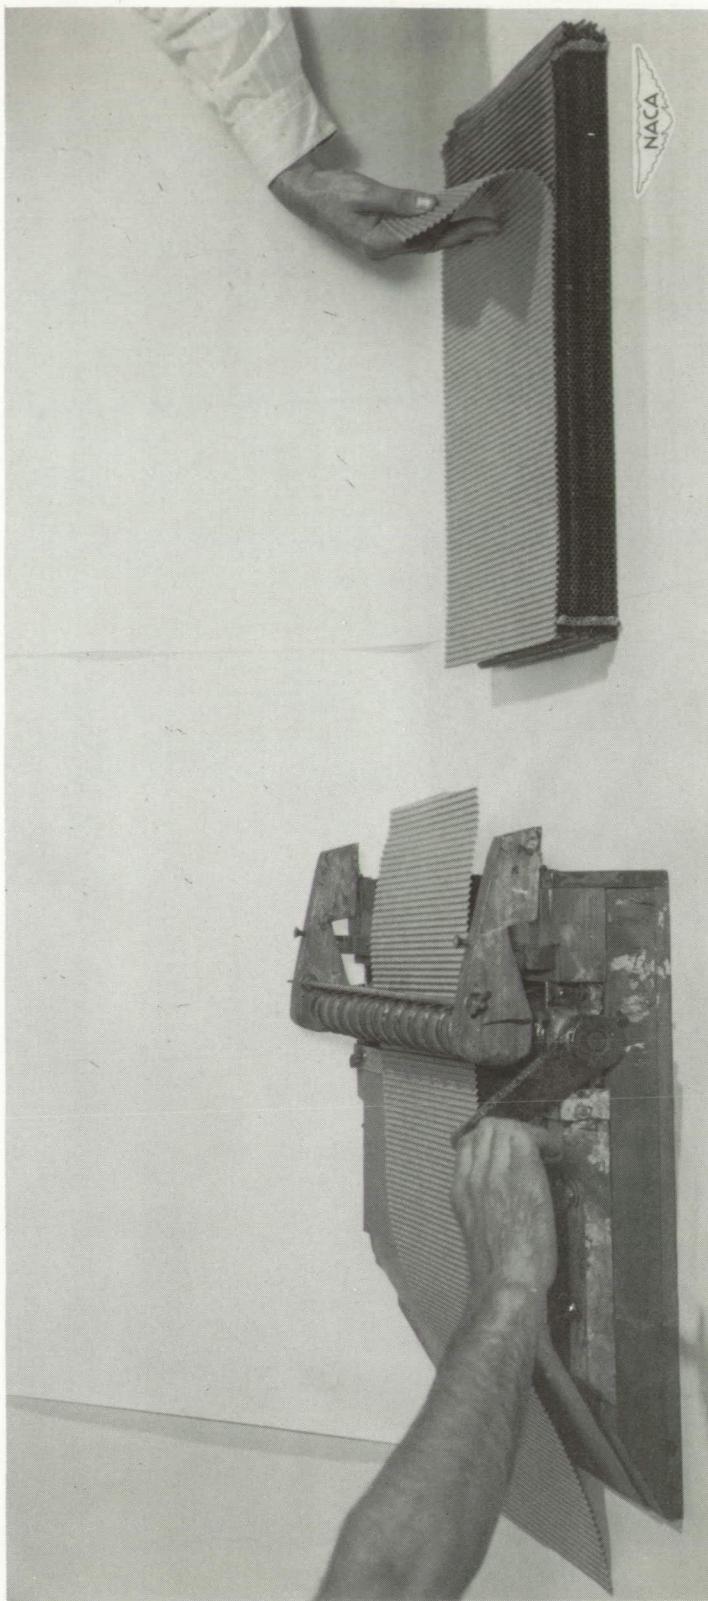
Left, hand-driven glue spreader used to apply resin treatment B to corrugated sheet. Right, assembly of sheets to make core material.
